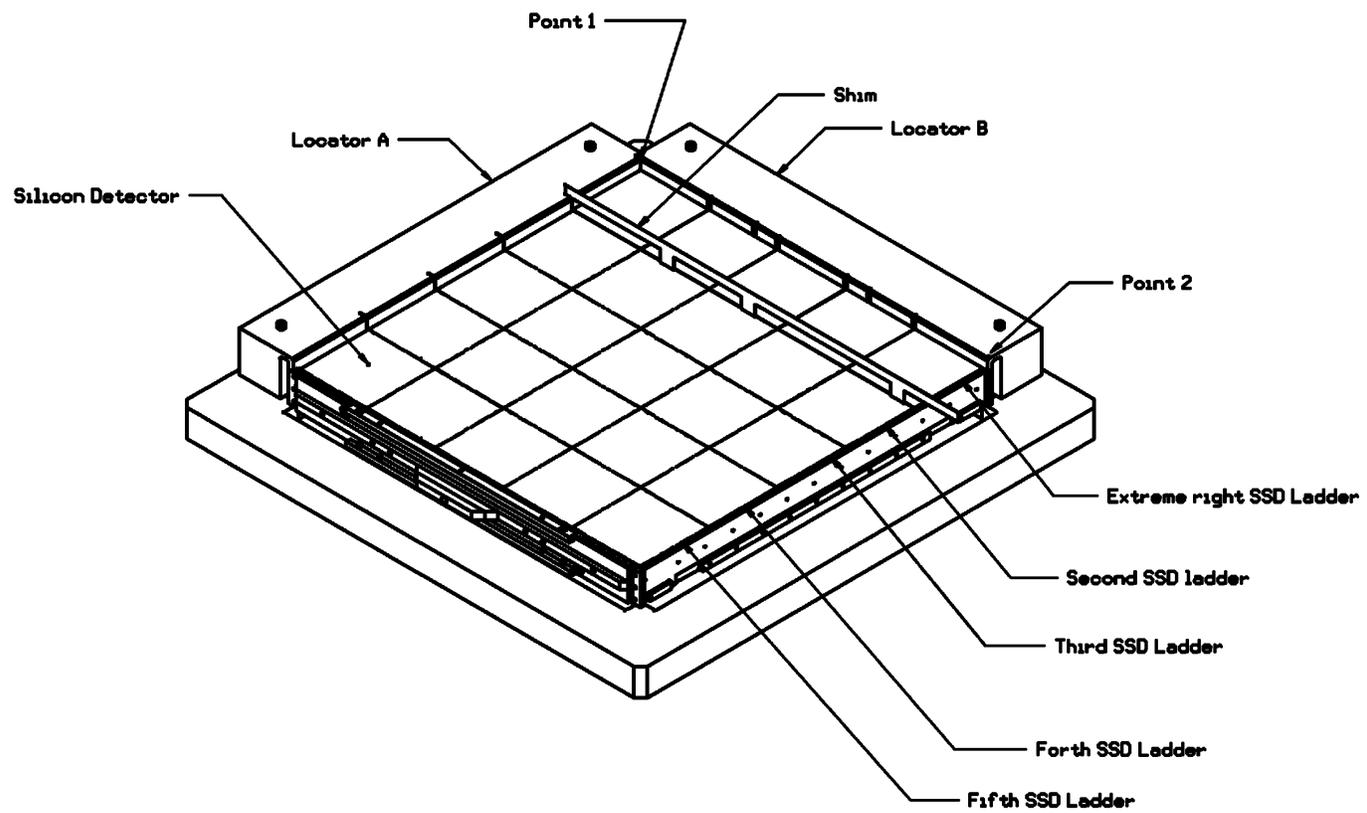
Schematic drawing of the fixture to mount ladders onto the trays before wire bonding to the kapton interconnect.
